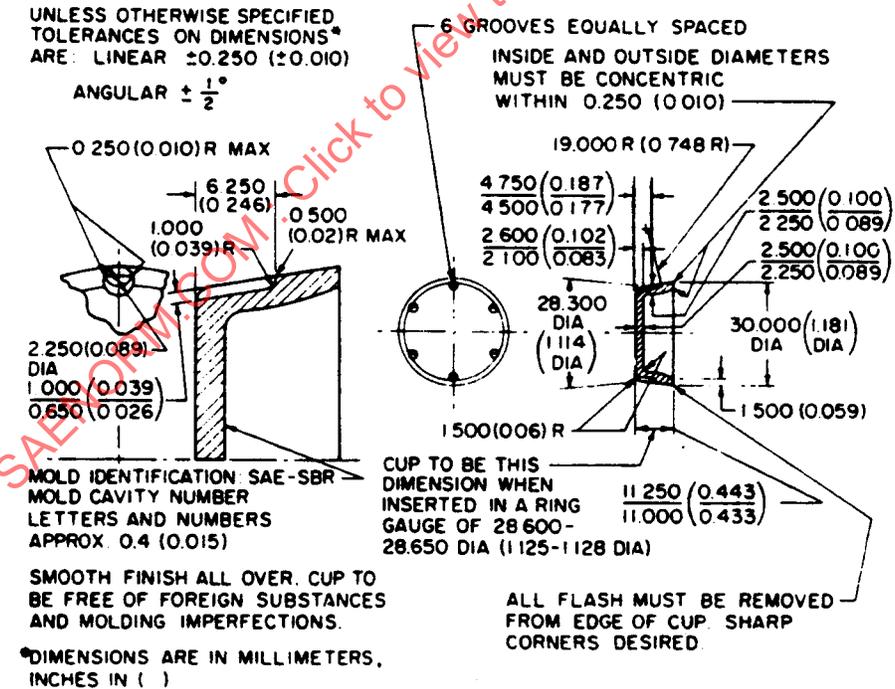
SAE TEST CUP—PRIMARY MASTER CYLINDER
